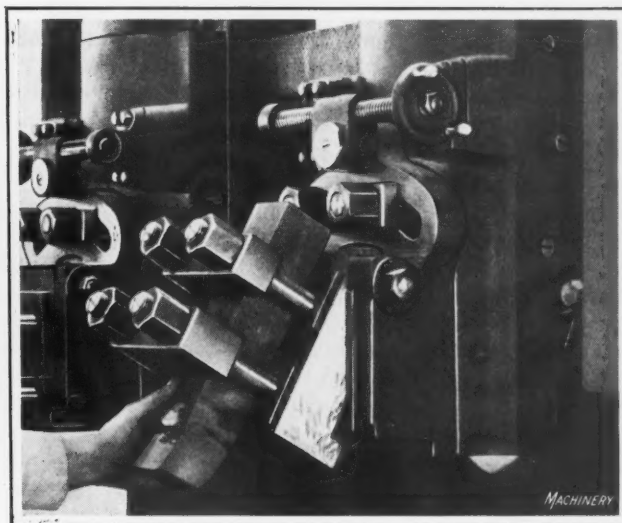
View showing Shoulder on Apron that takes the Upward Thrust
